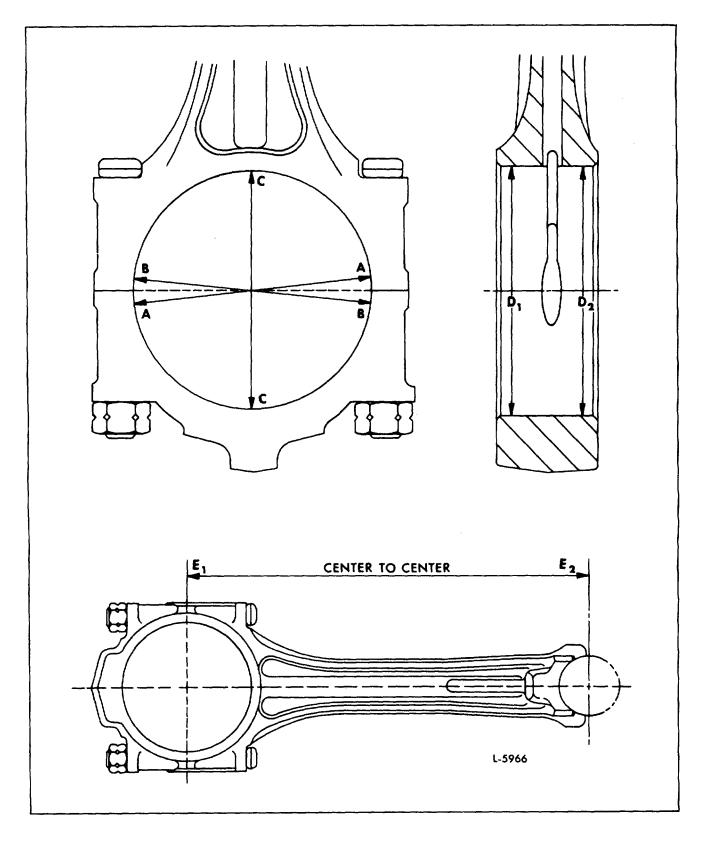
Dimensional Inspection of Cross-Head Piston Connecting Rods
